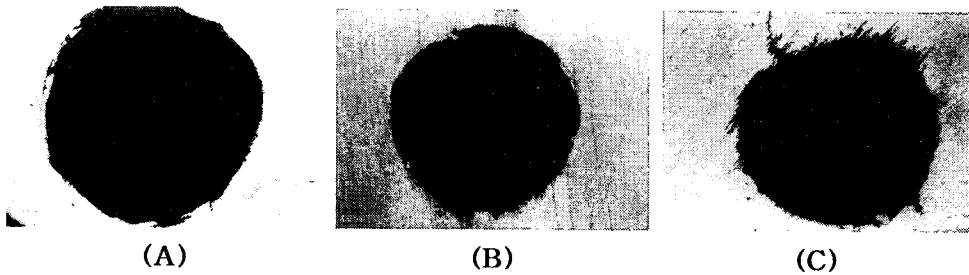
Wearing shape of machining tips after 5 hours continuous welding(x40) A) CU tip, B) CR tip, C) CT tip
